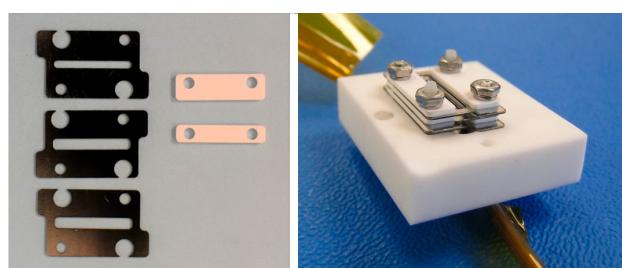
Laser cutting. Molybdenum sheets and alumina laser-cut and stacked onto an electromechanical device.
